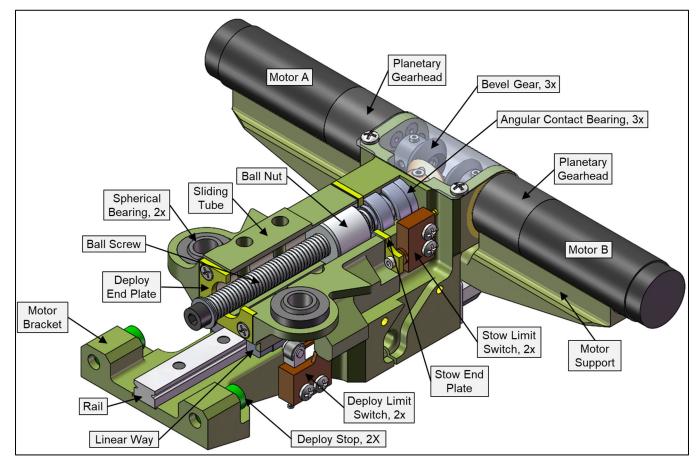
Motor Bracket Assembly shown in the stowed state (some parts sectioned for clarity)
